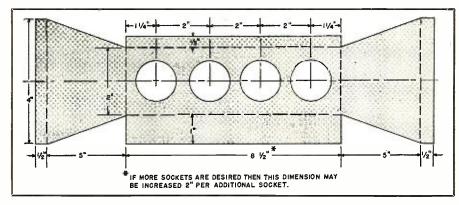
Metal blanking of a 4 tube development chassis. It is similar to the completed unit shown in Fig. 4, provisions for a power supply being omitted.
